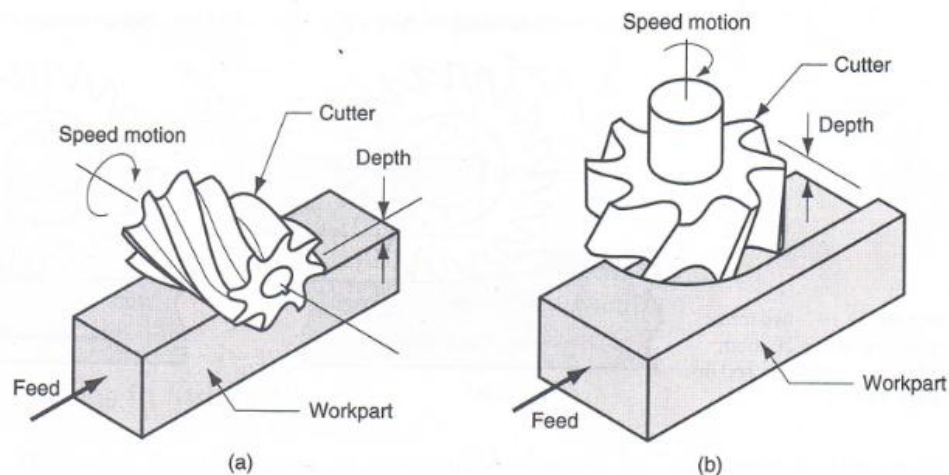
Basic types of milling operations :(a) Peripheral Milling (b) Face Milling
